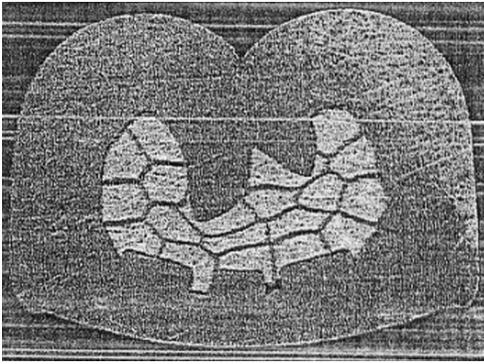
Crimp-press-welded cross-section of a 0.82 mm² 19-strands copper-clad-aluminum stranded conductor cable
